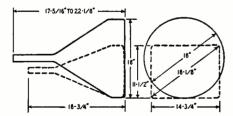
While picture size is about the same, the rectangular tube has smaller overall dimensions than the round tube.
